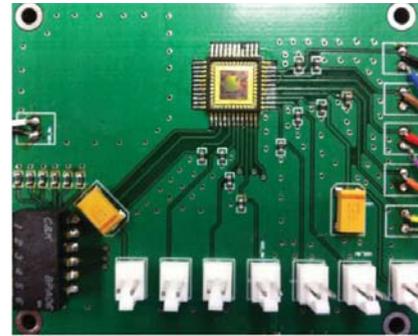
7.8GHz divide-by-2 ILFD test chip packaged and mounted on FR-4 board.
